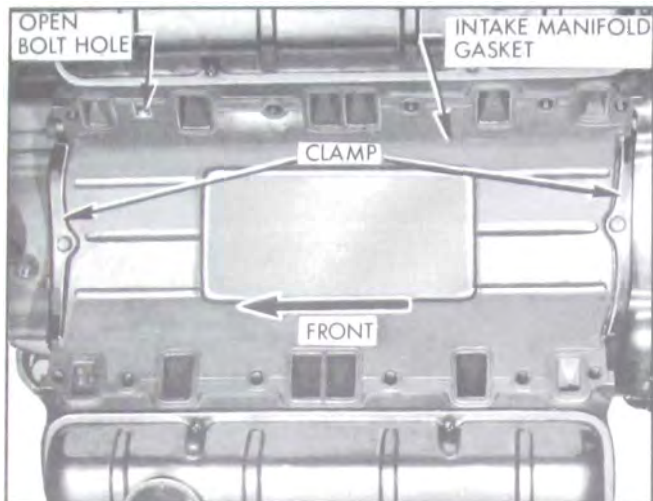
V-8 Intake Manifold Gasket and Clamps - Top View
